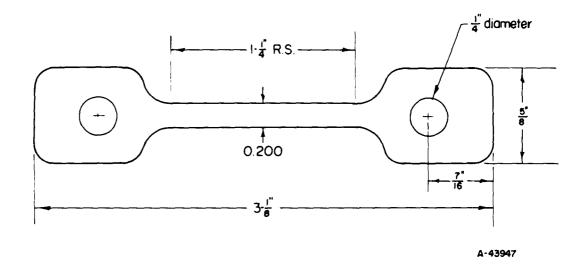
TENSILE TEST SPECIMEN (BEFORE COATING)
